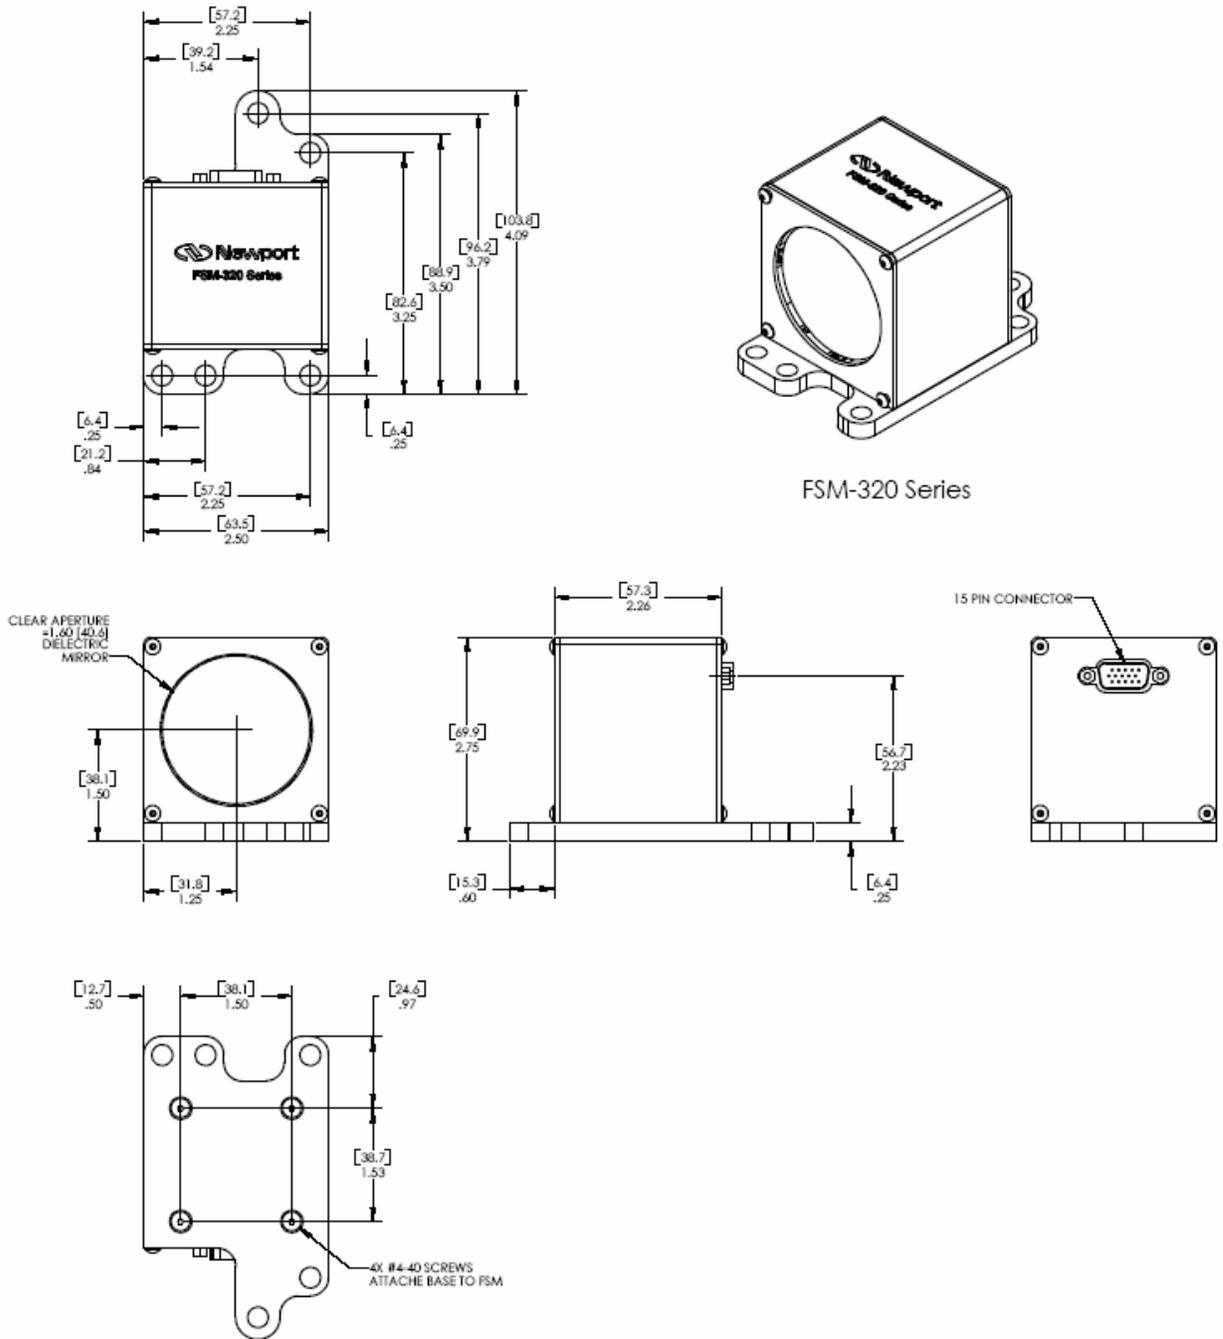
Detailed Drawing of FSM-320 Mirror Head Housing.
